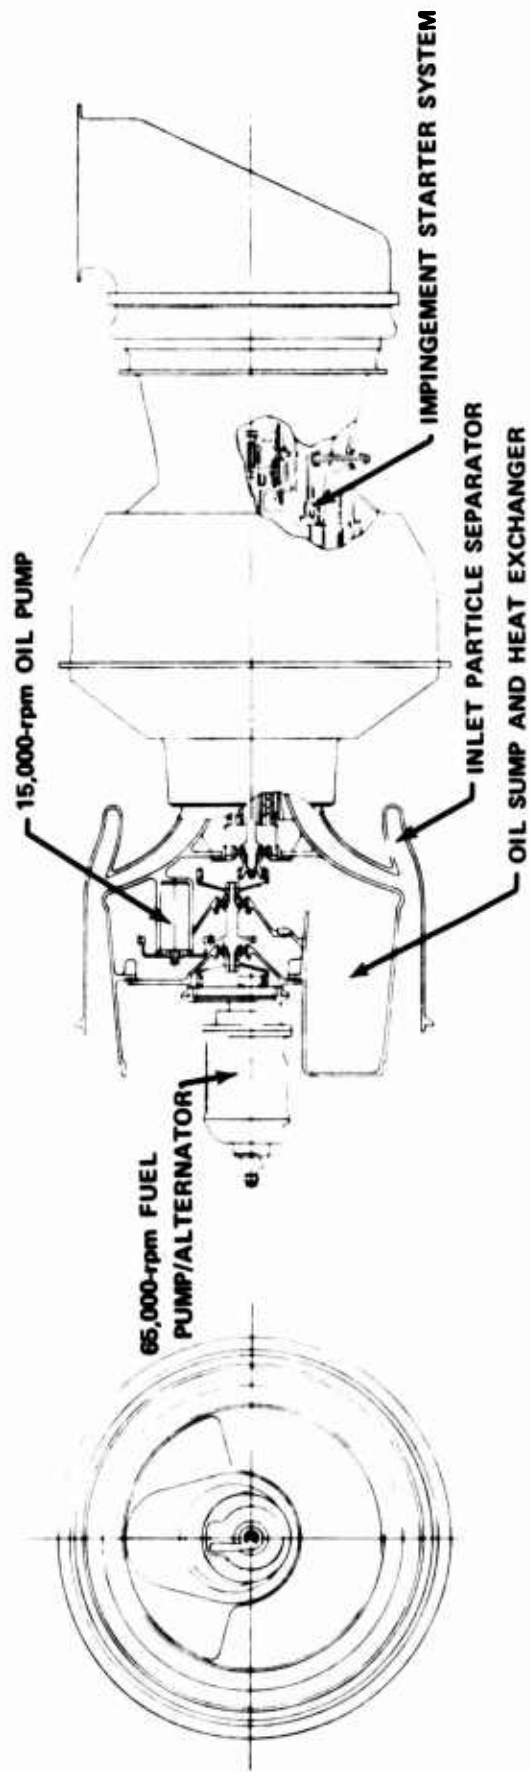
Cluster Gearbox Drive/Air Turbine Starter
